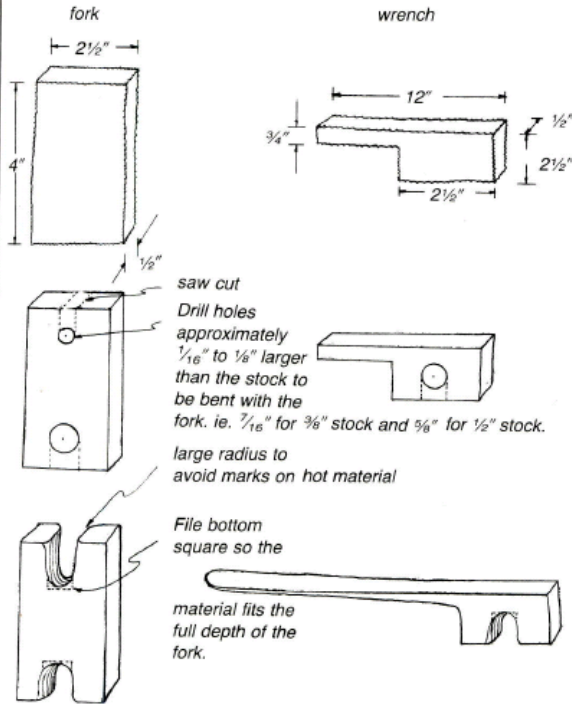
Bending fork and wrench blanks torch cut from a used grader blade.
